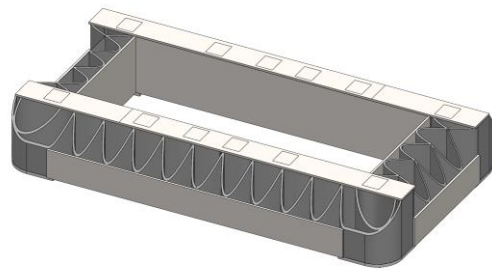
Isometric view of final WAAM print geometry with steel plates.
